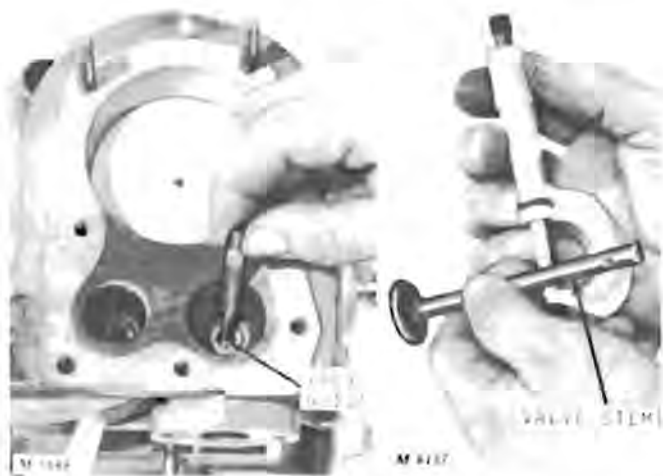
Measuring Valve Guide Fig. 15—Measuring Valve Stem
